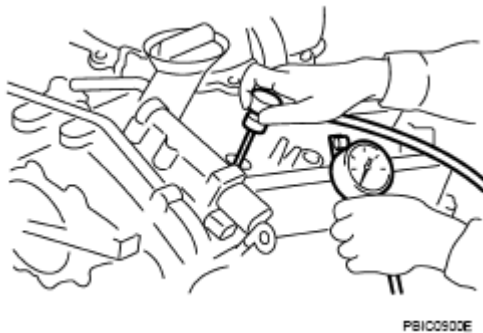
Installing Compression Gauge With Adapter Onto Spark Plug Hole
